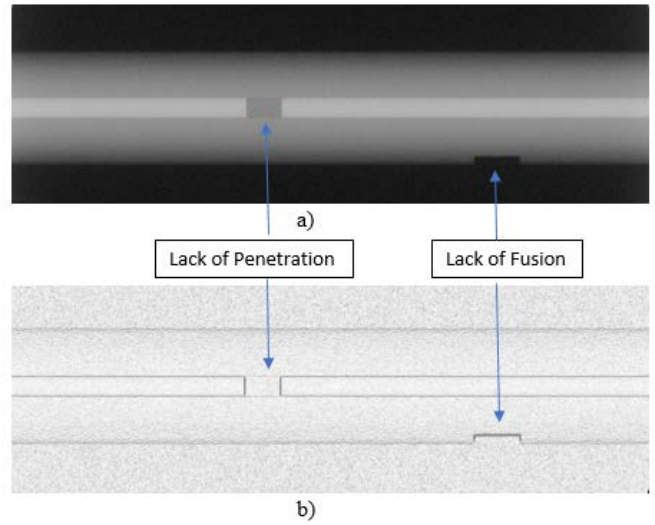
a) Welded plate radiograph using X-ray.
